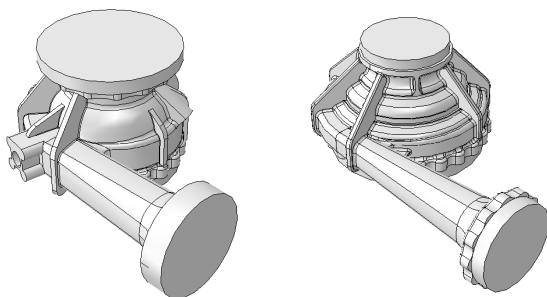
Modified shape of volute casing for oxidizer pump(left) and fuel pump(right)
